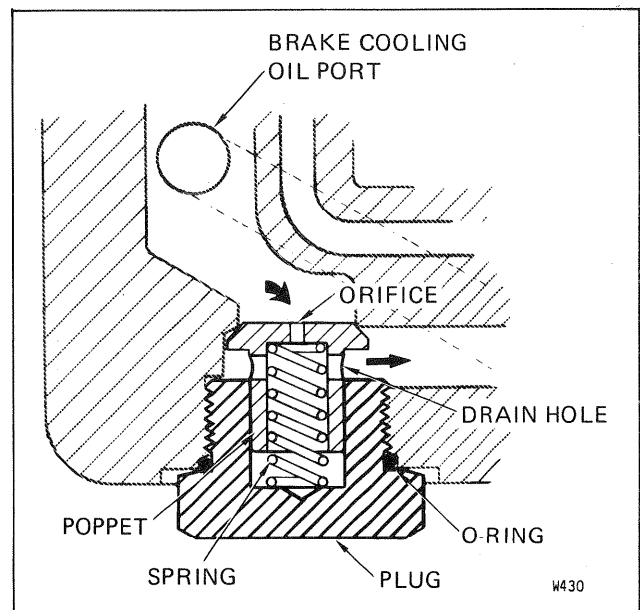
BRAKE COOLING OIL RELIEF VALVE ASSEMBLY, POWER CONTROLLED WINCH
